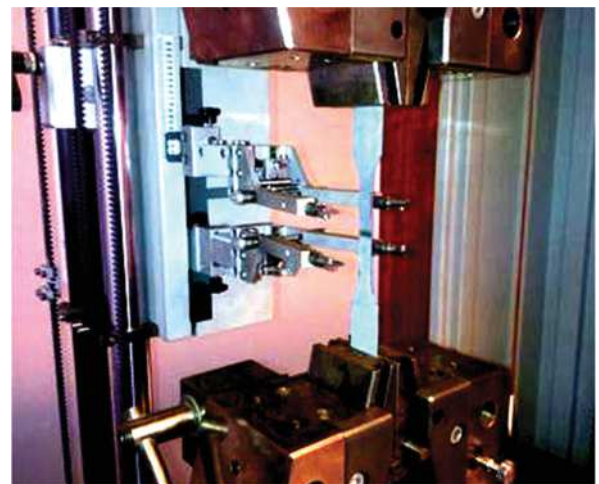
A view of the tensile sample during static tensile test of a butt joint of 2.0 mm thick steel sheet AISI 304
